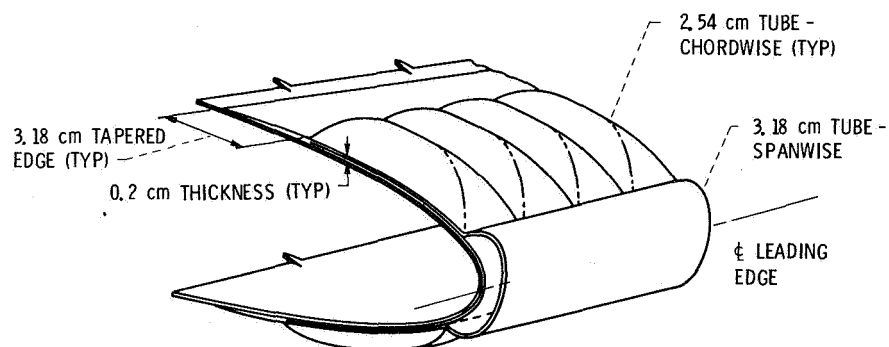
Typical cross section of installed deicer (inflated), large tube.
